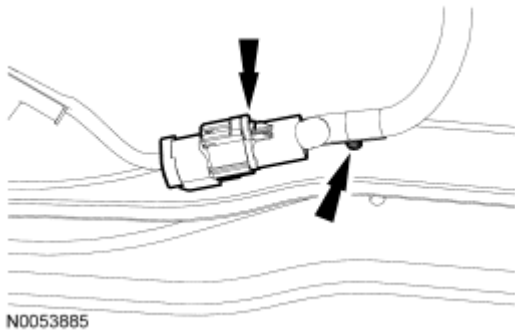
Locating Engine Oil Pressure (EOP) Sensor Electrical Connector
